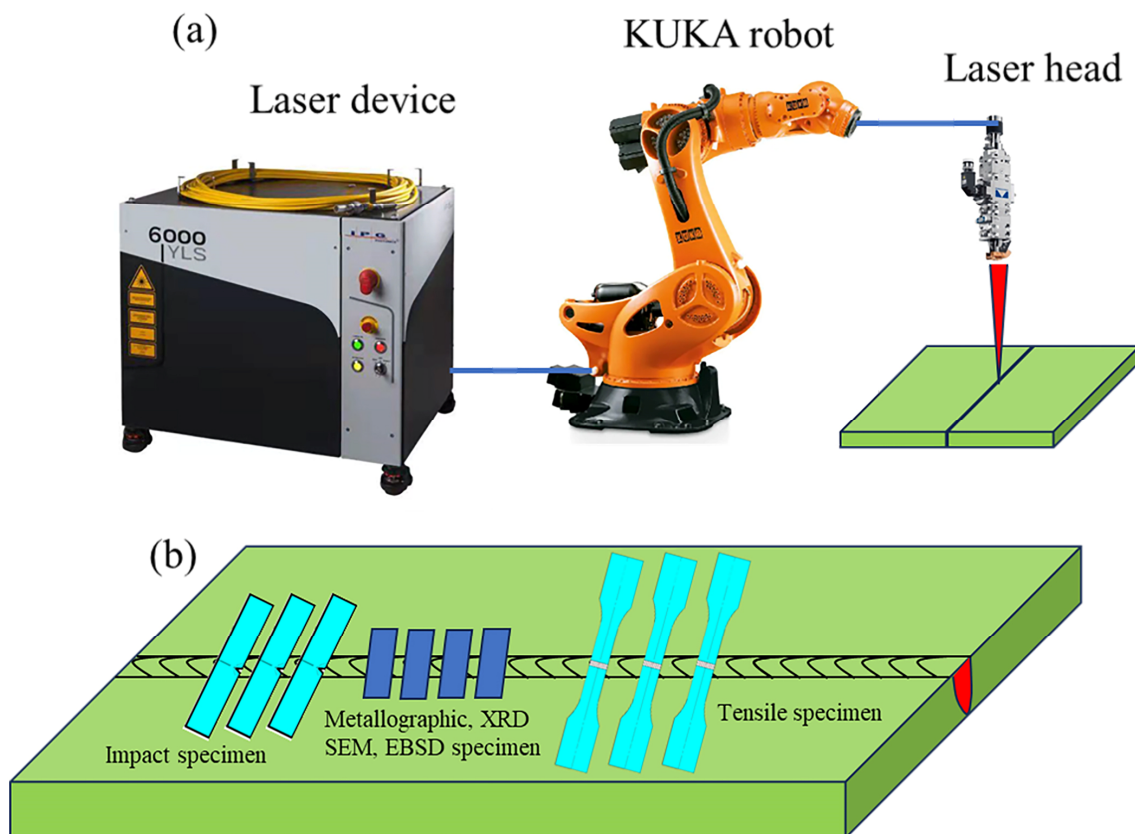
Schematic of welding machines and experimental trials. (a) welding machines; (b) experimental trials.
